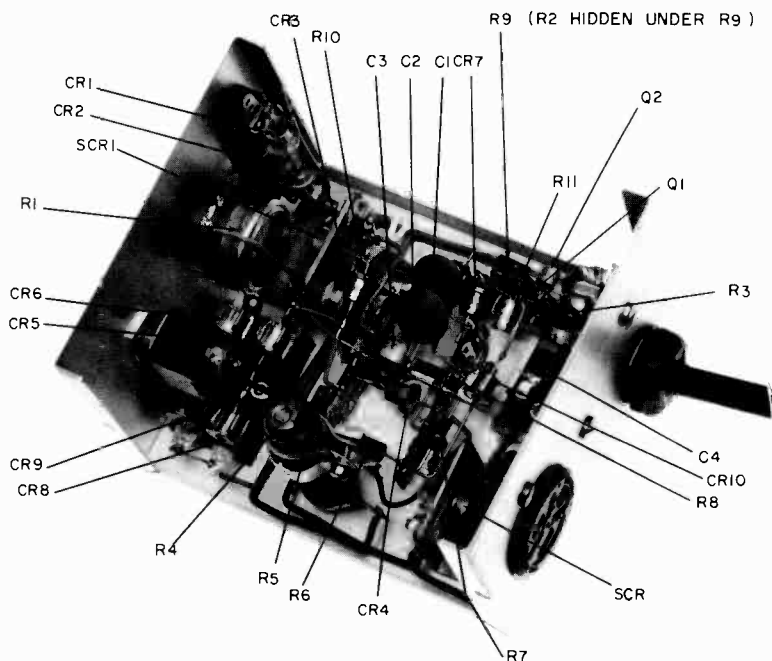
Suggested method of construction of the motor-speed control in a 3- by 4- by 5-inch chassis.
